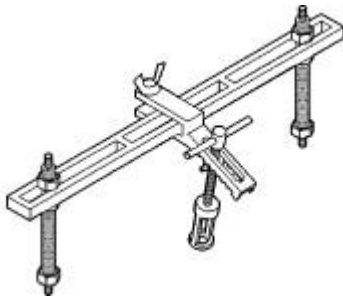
COMPRESSOR, VALVE SPRING - MD998772A
